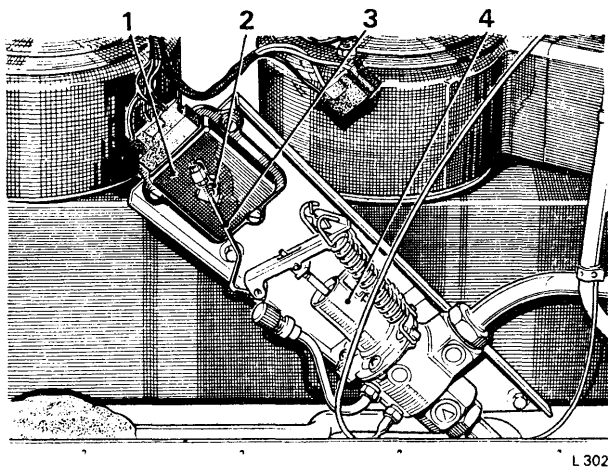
SUCTION THROTTLING VALVE ACTUATOR SETTING
